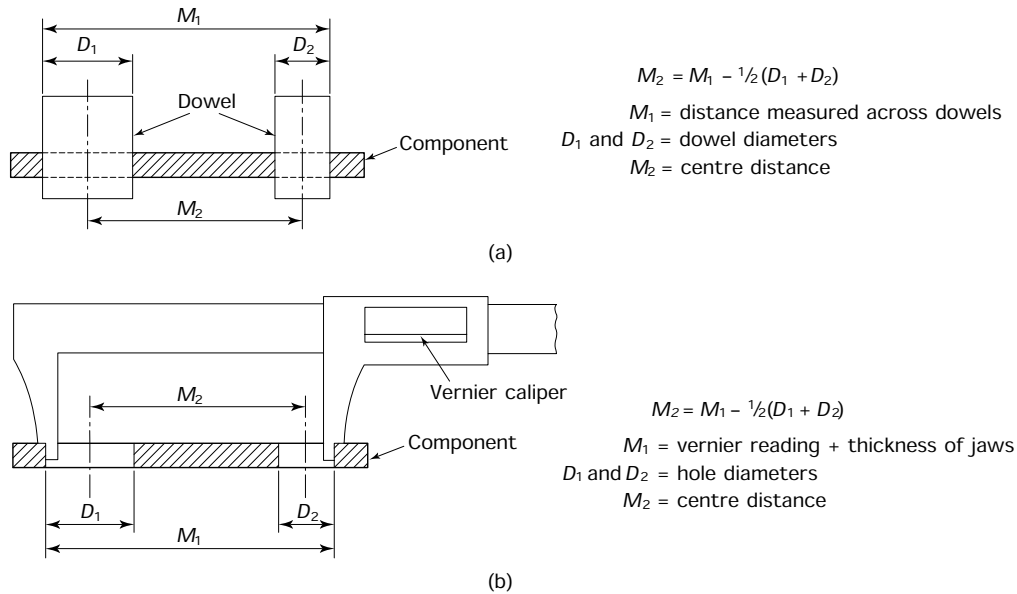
Link: checking hole centres: (a) checking across dowels; (b) checking with a vernier caliper – always check to outside of holes to obtain line contact
